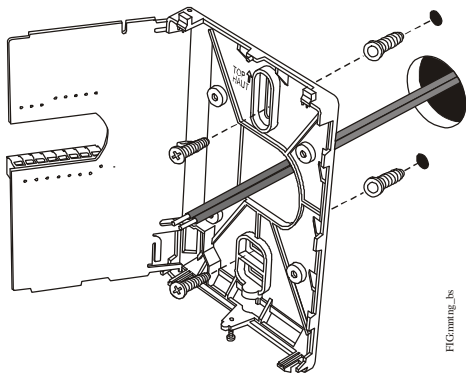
Securing the Thermostat Controller Mounting Base to the Wall
